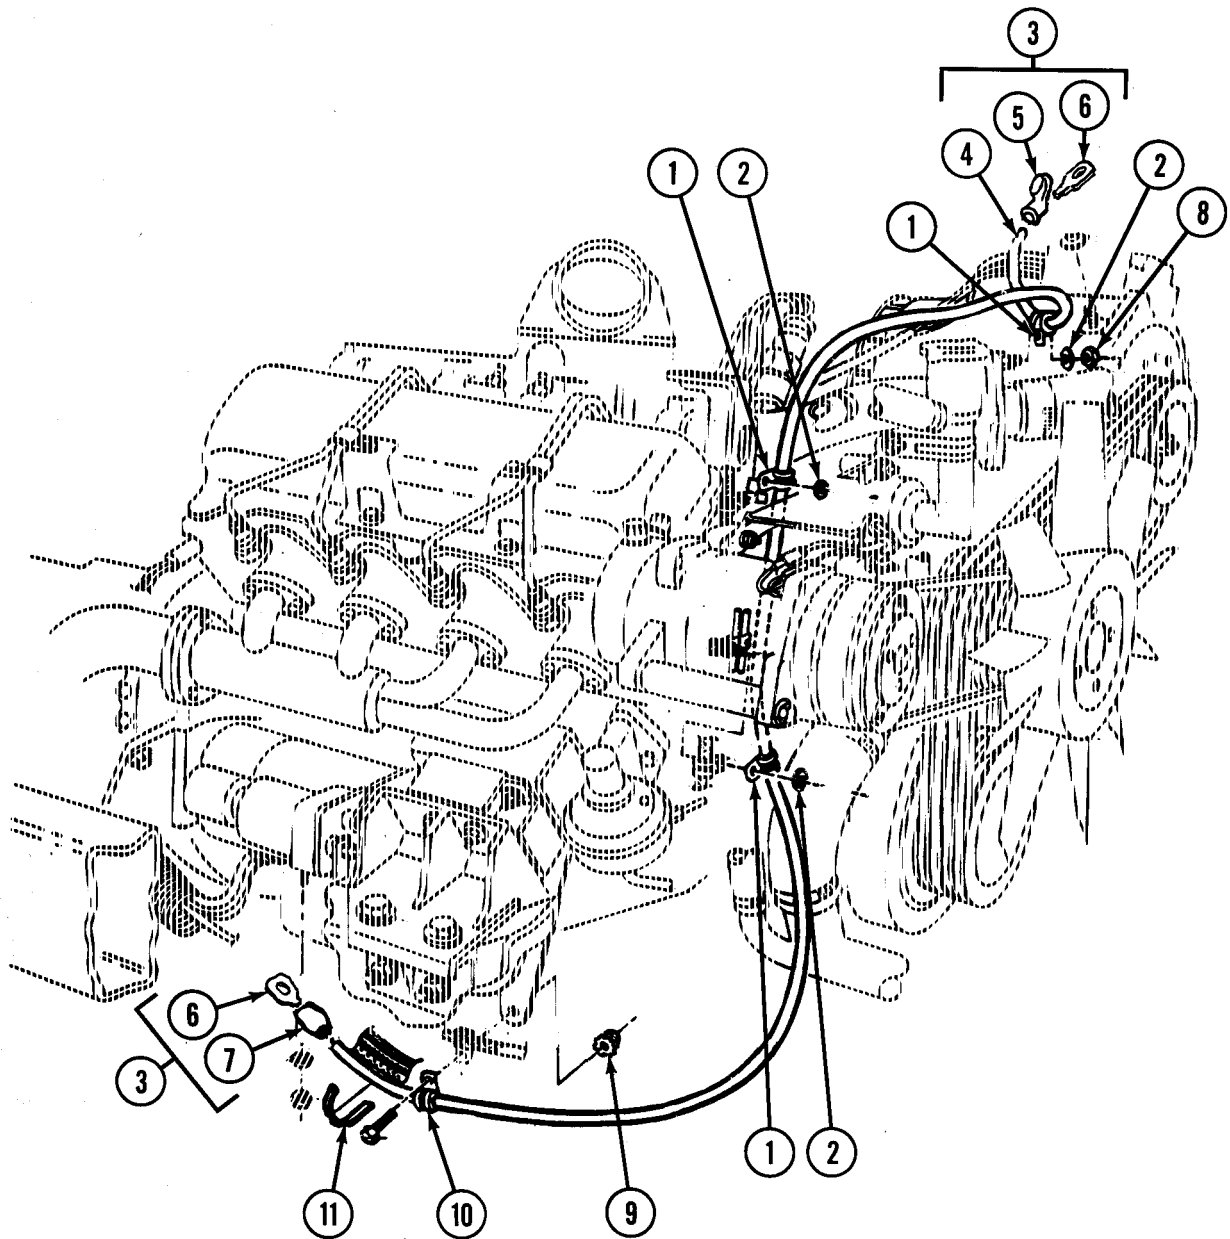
EES Kit, 200 Amp Alternator Cable Assembly
